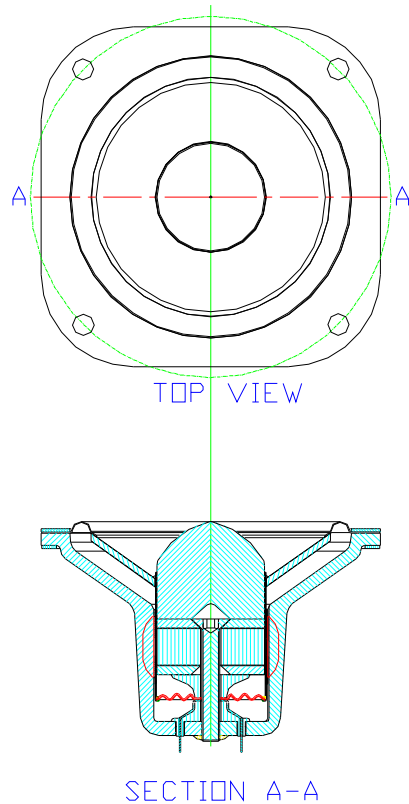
AN EXAMPLE 4 INCH FULL RANGE TRANSDUCER ASSEMBLY UTILIZING A SANDWICH COMPOSITE CONE.
